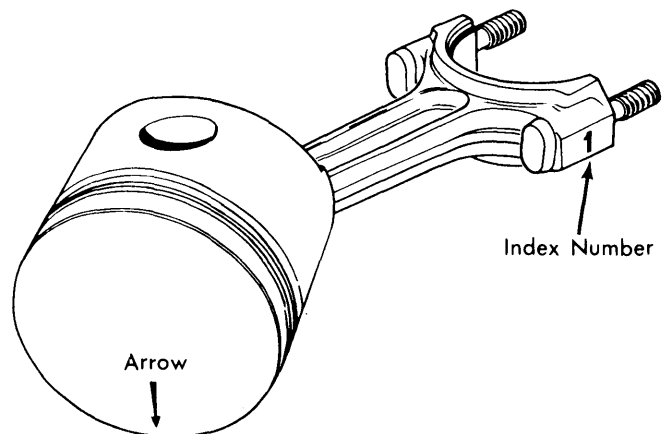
Piston and Connecting Rod Assembly with Detail of Index Markings
